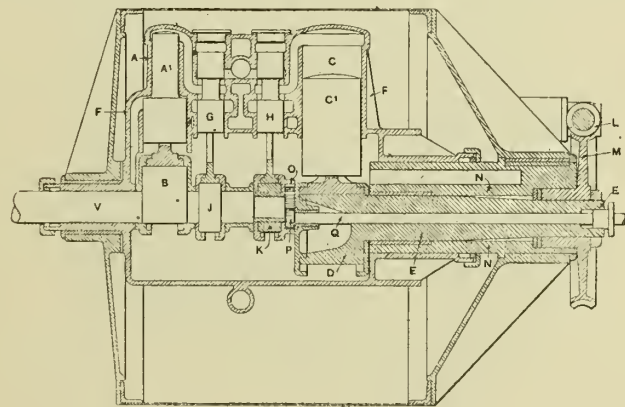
DIAGRAM OF HALL HYDRAULIC GEAR.
